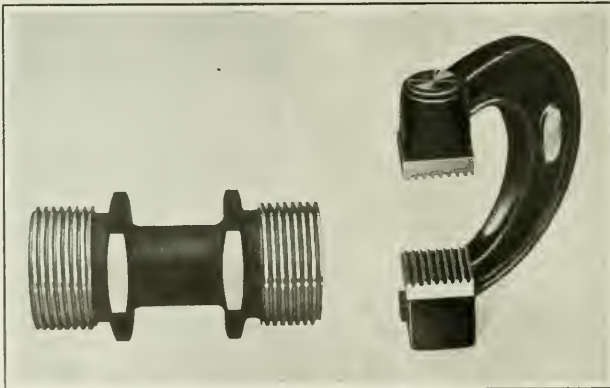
An Acme Thread Gage with Plug for setting to Size
